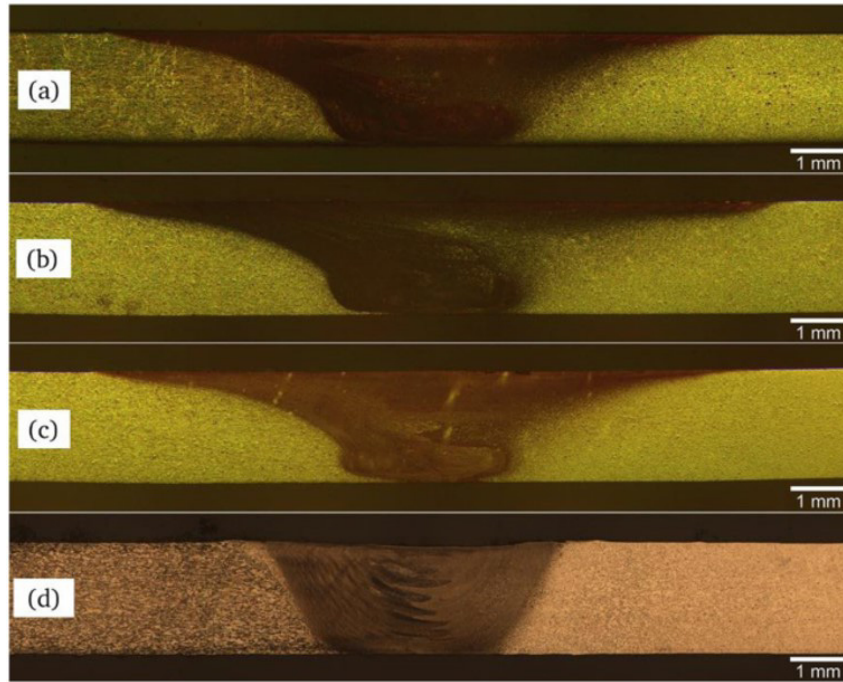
AA2024–AA7050 weld cross-section: FSW at 600 rpm and different welding speeds (a) 180mm/min, (b) 300mm/min, (c) 480mm/min, and (d) NRSA-FSW at 1200 rpm and 180mm/min [119].
